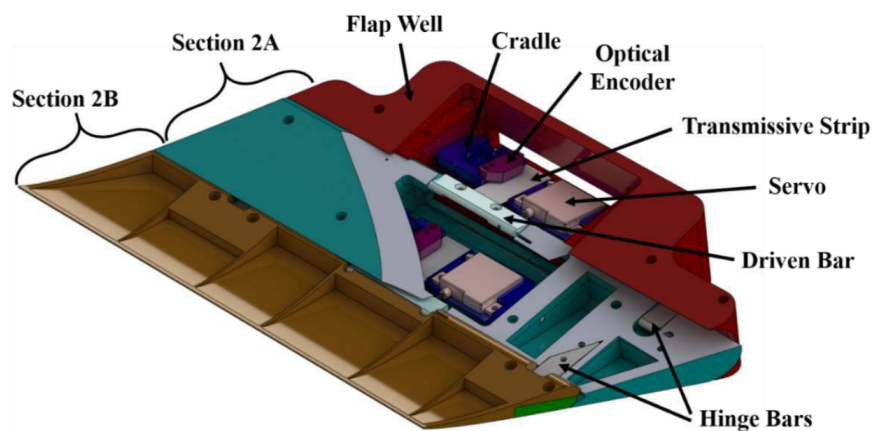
Exploded View of VCCTEF Actuator Assembly of Flaps 2A and 2B
